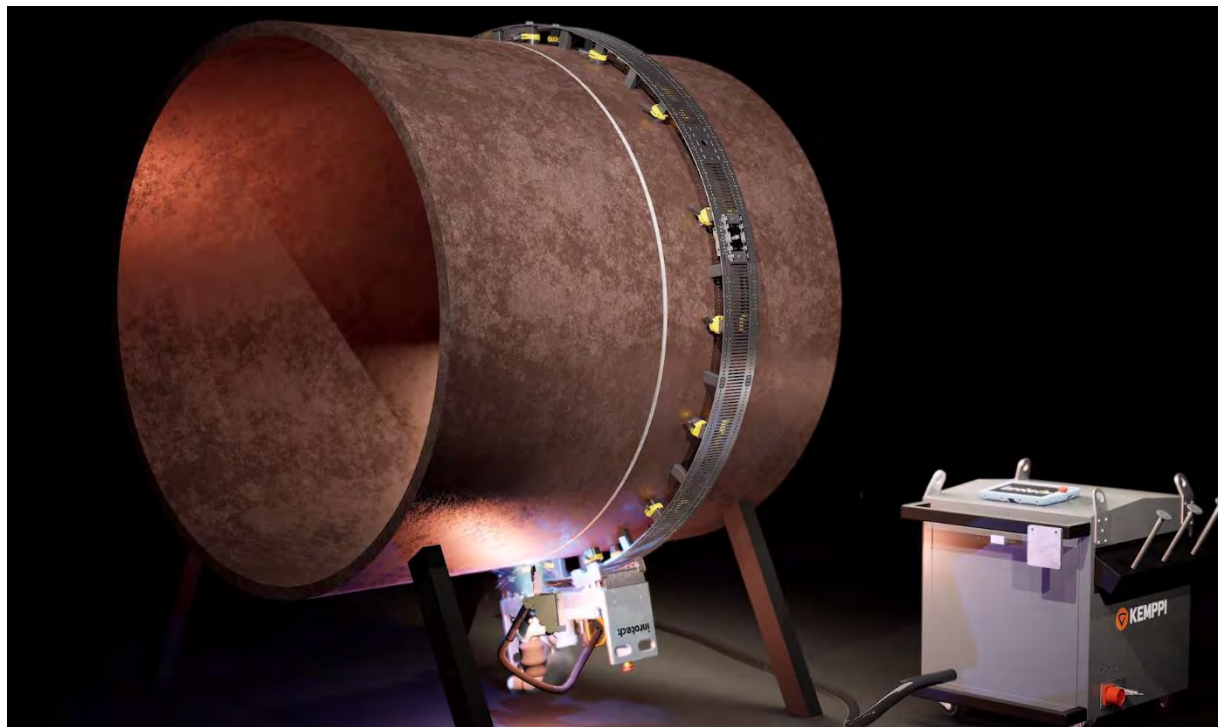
Welding robot on adaptable rail. [INR21]
